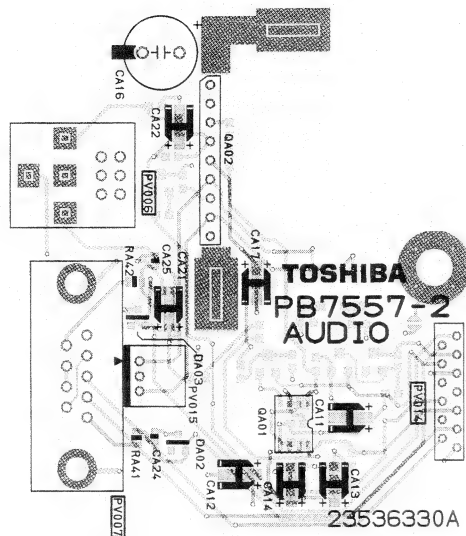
U0032 Audio PC Board (Top Side)
